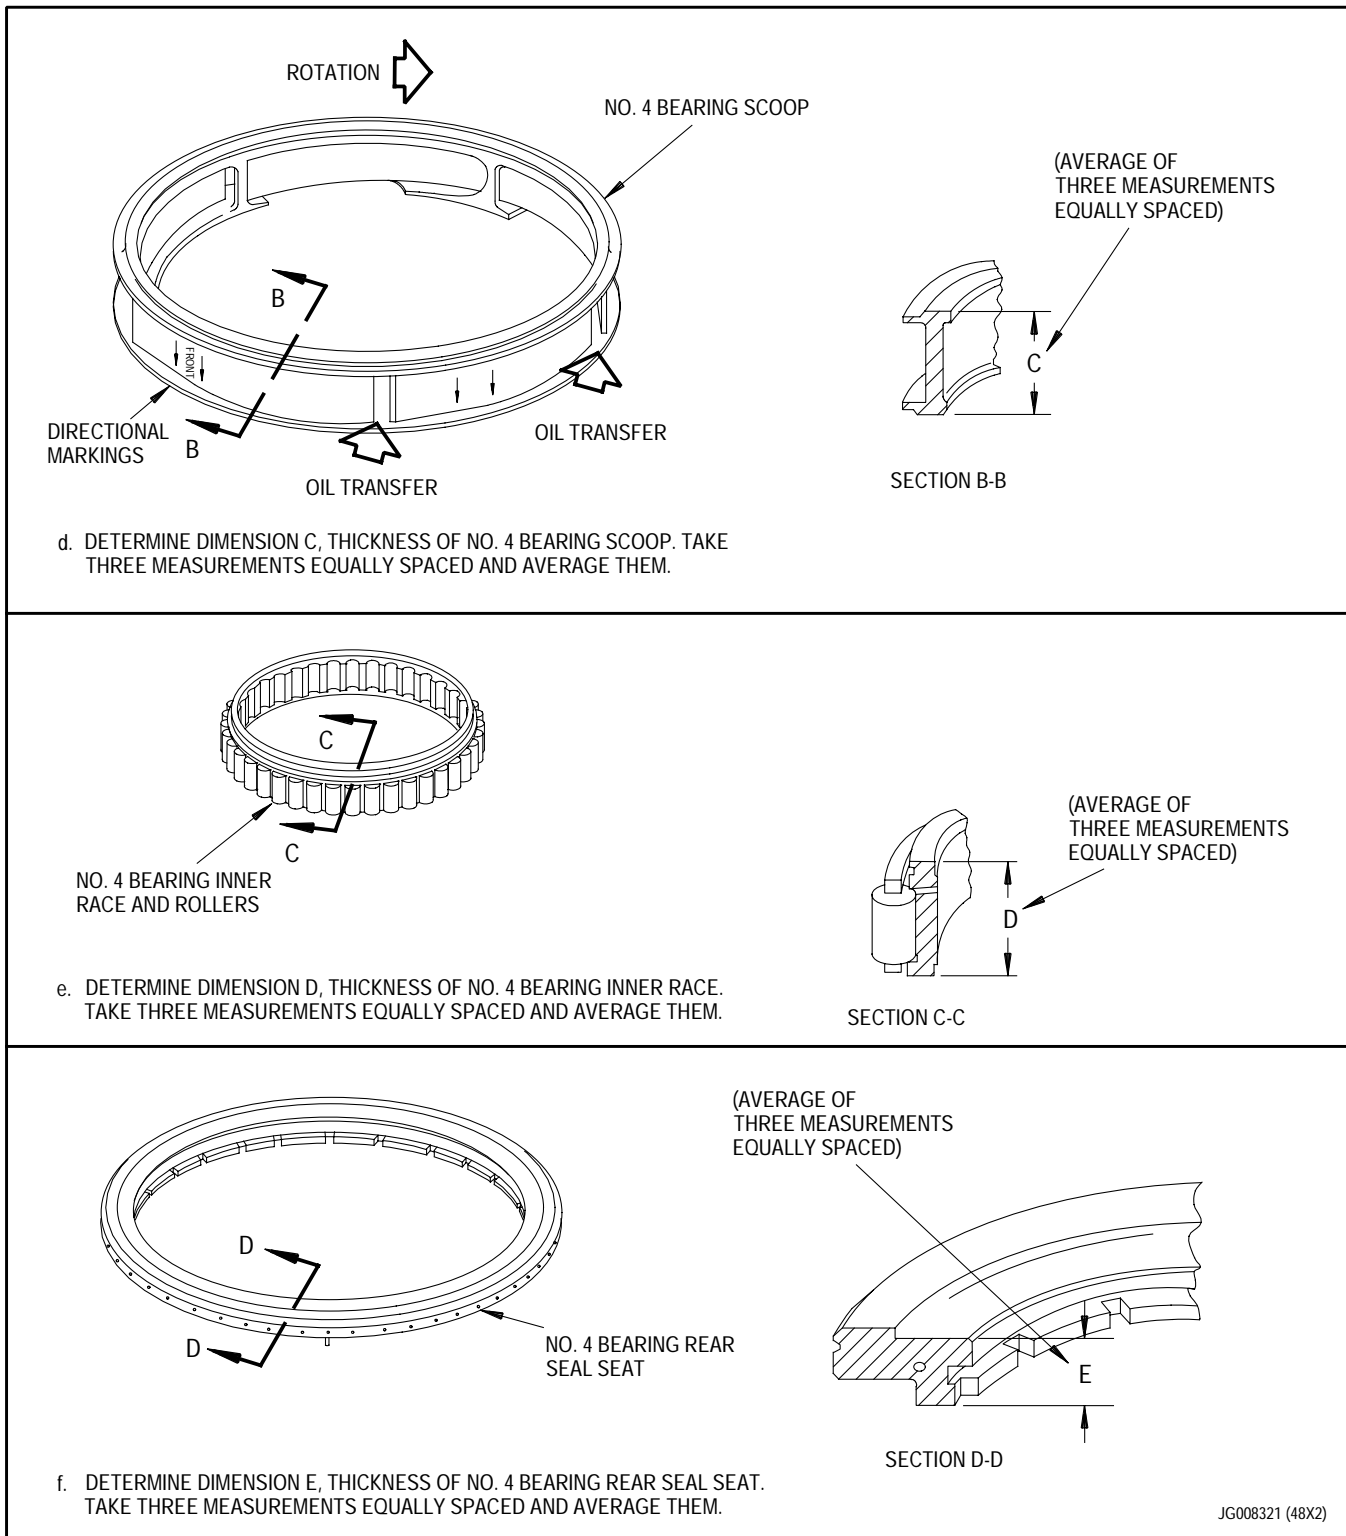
No. 4 Bearing Area - Measurement of Parts Before Installation (Sheet 2 of 3)
